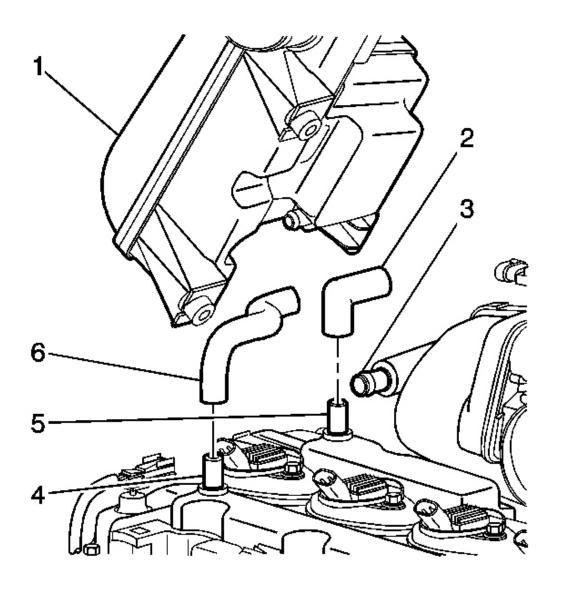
View Of Crankcase Ventilation System Courtesy of GENERAL MOTORS CORP.
